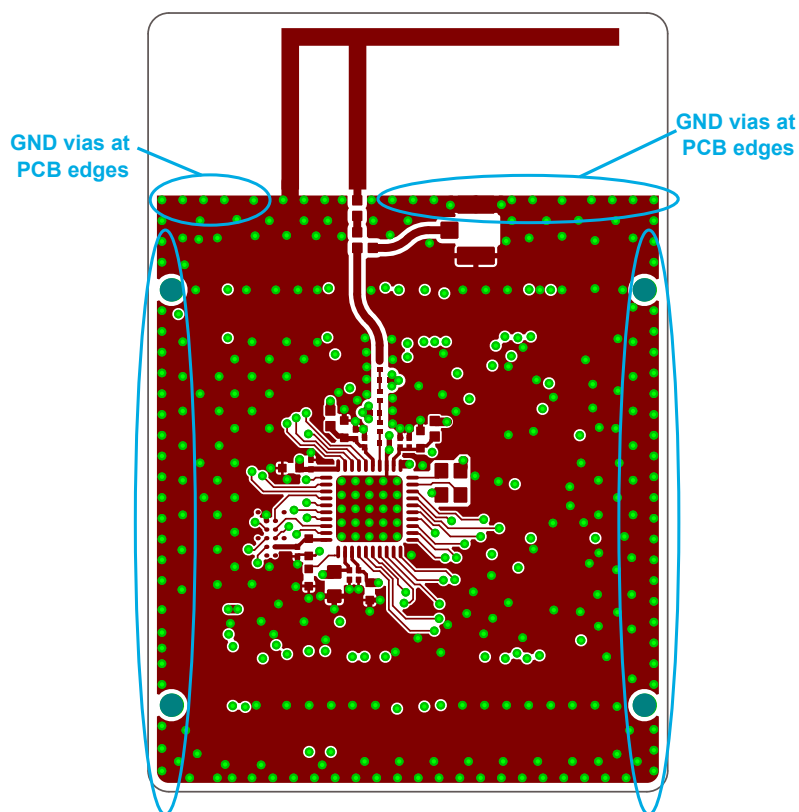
GND Vias at PCB Edges on BRD4408A Radio Board (Top Layer)
